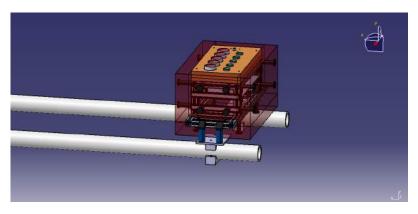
Top view of the sensor box mounting on the booms (upper and bottom).
